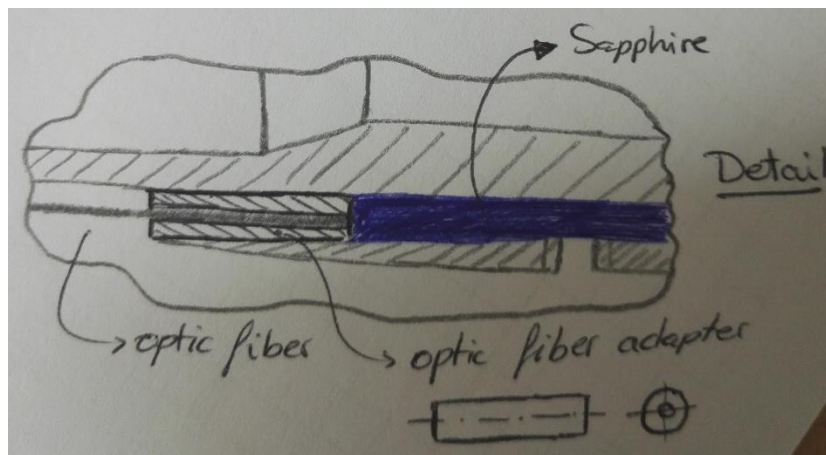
Concept for the optical fiber's adapter that would be inserted on the hole
